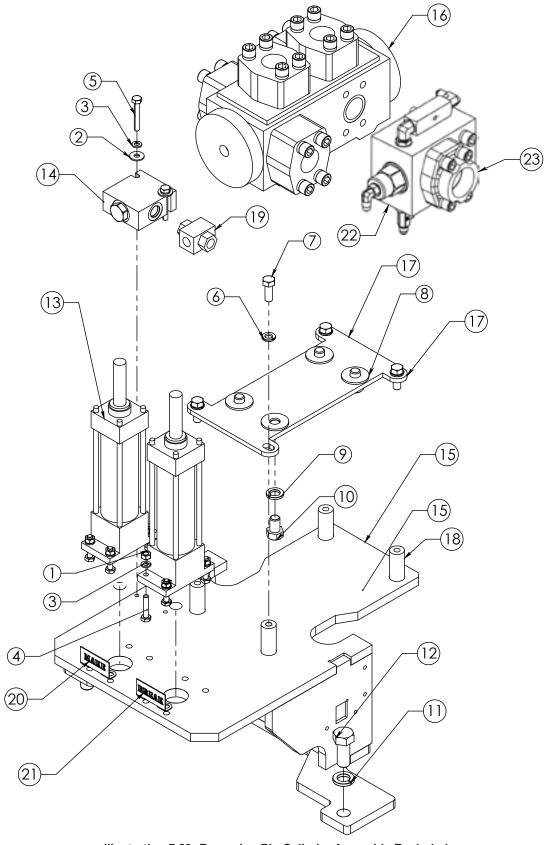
Reversing Pin Cylinder Assembly Exploded
